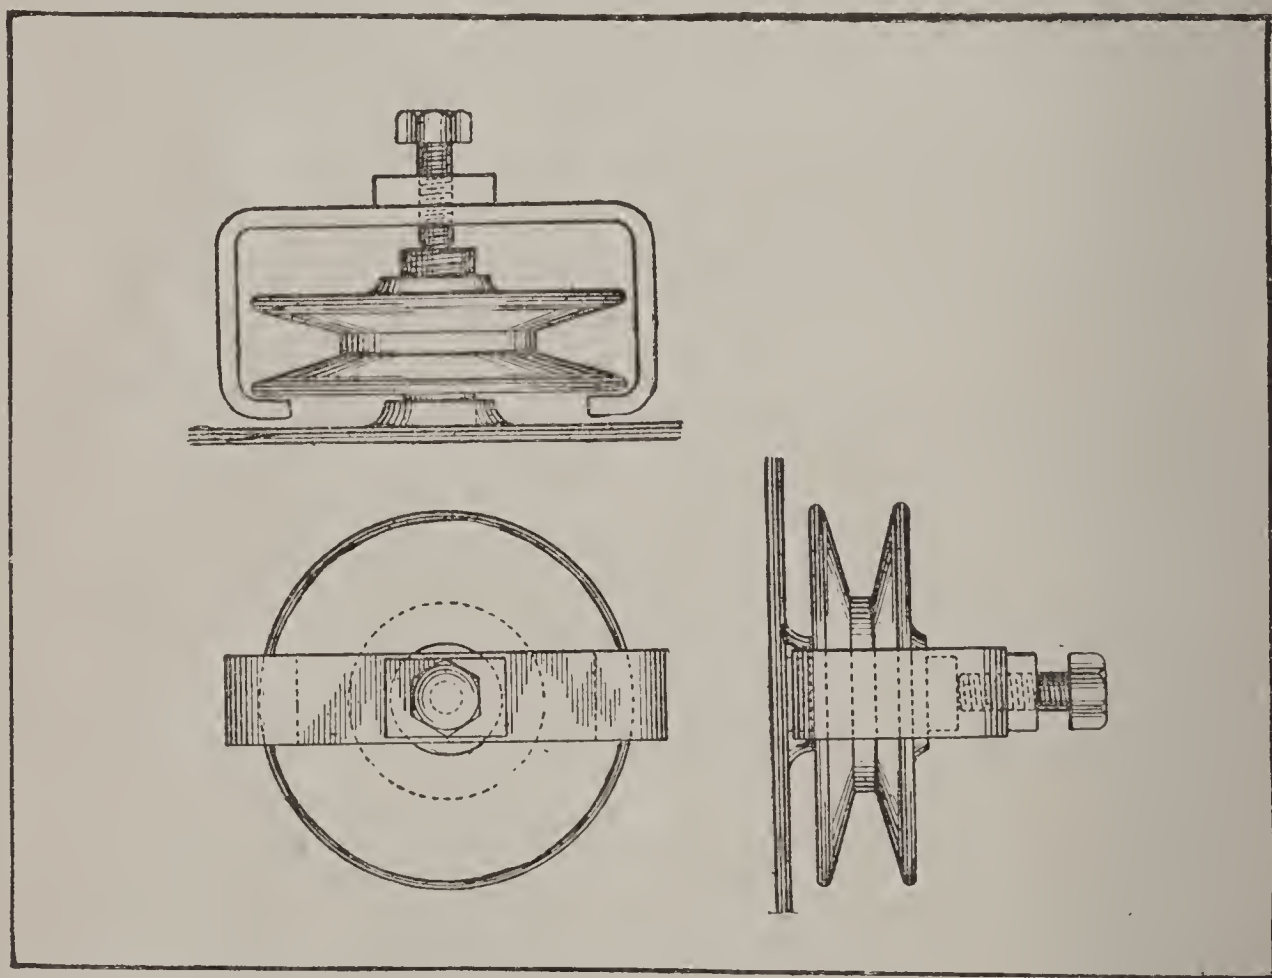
Diagram Showing Construction of Simple Puller for Removing V Pulleys or Sprockets From the Taper on End of Engine Crankshaft.
